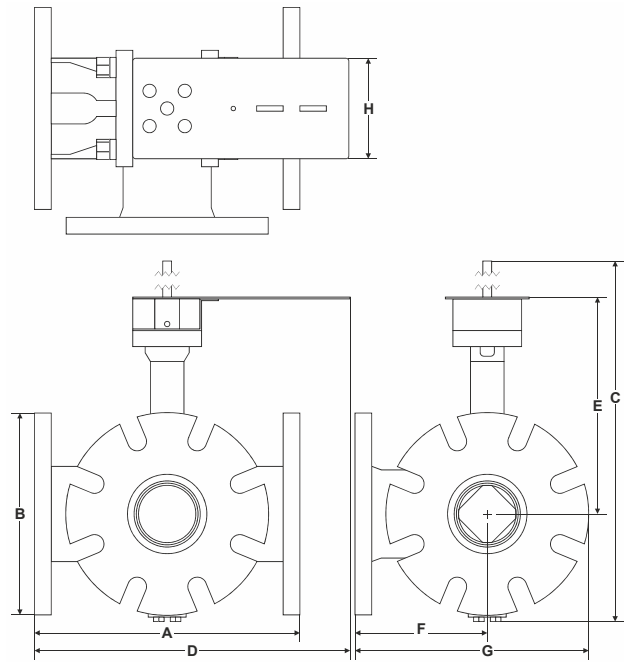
Three-way DN 100 ... 150 valve dimensions
